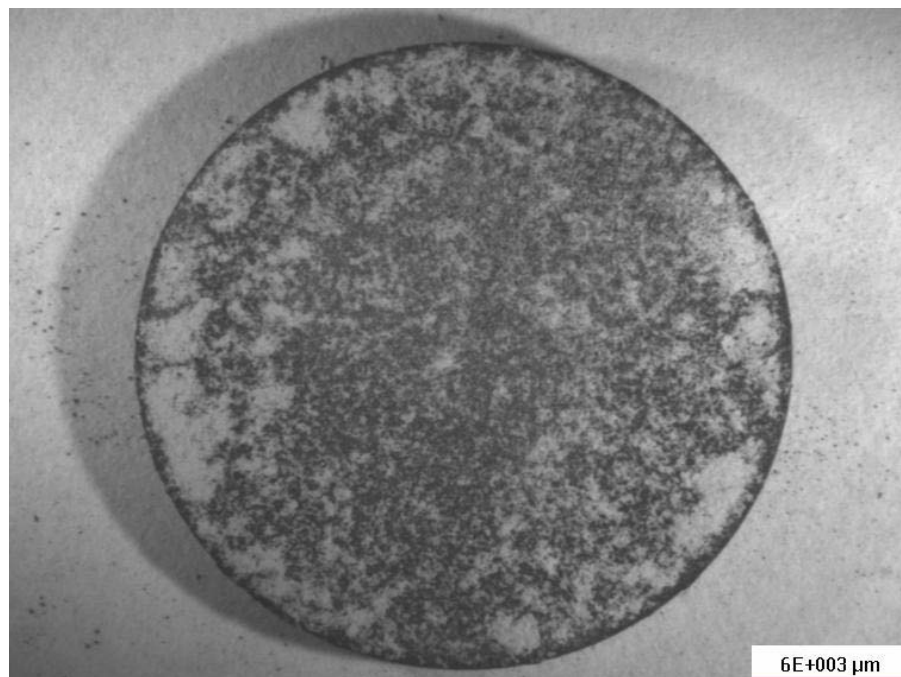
Fracture surface of the 30 mil specimen exposed in the pseudo-isothermal.
